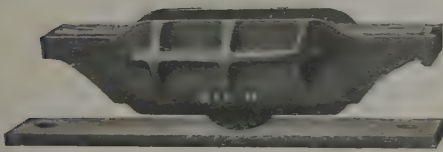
Passenger Train Car Side Bearing. Edwin S. Woods & Company.
